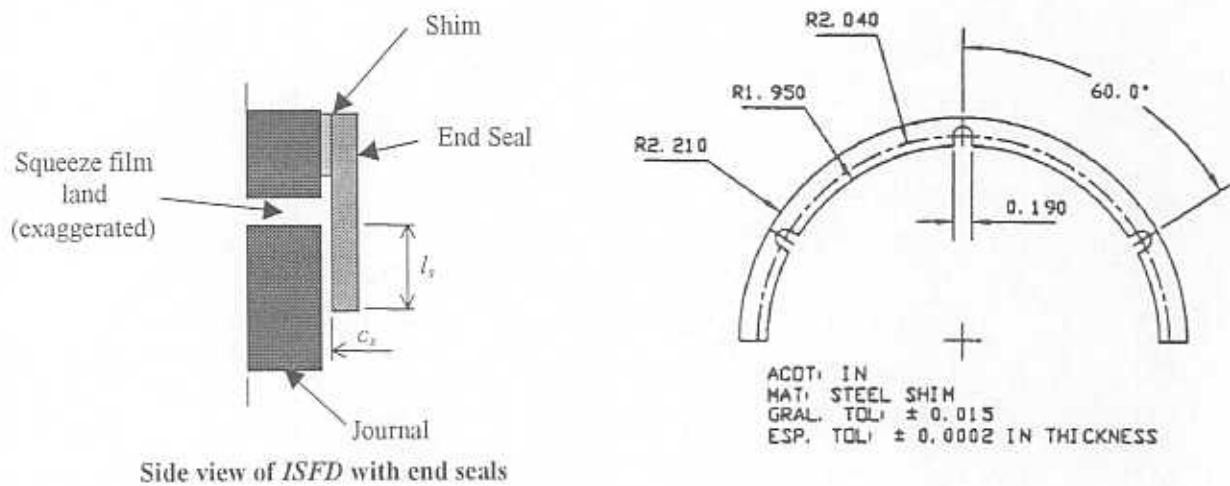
Calibrated stainless steel stock shim and side view of the *ISFD* with end plate seal.
